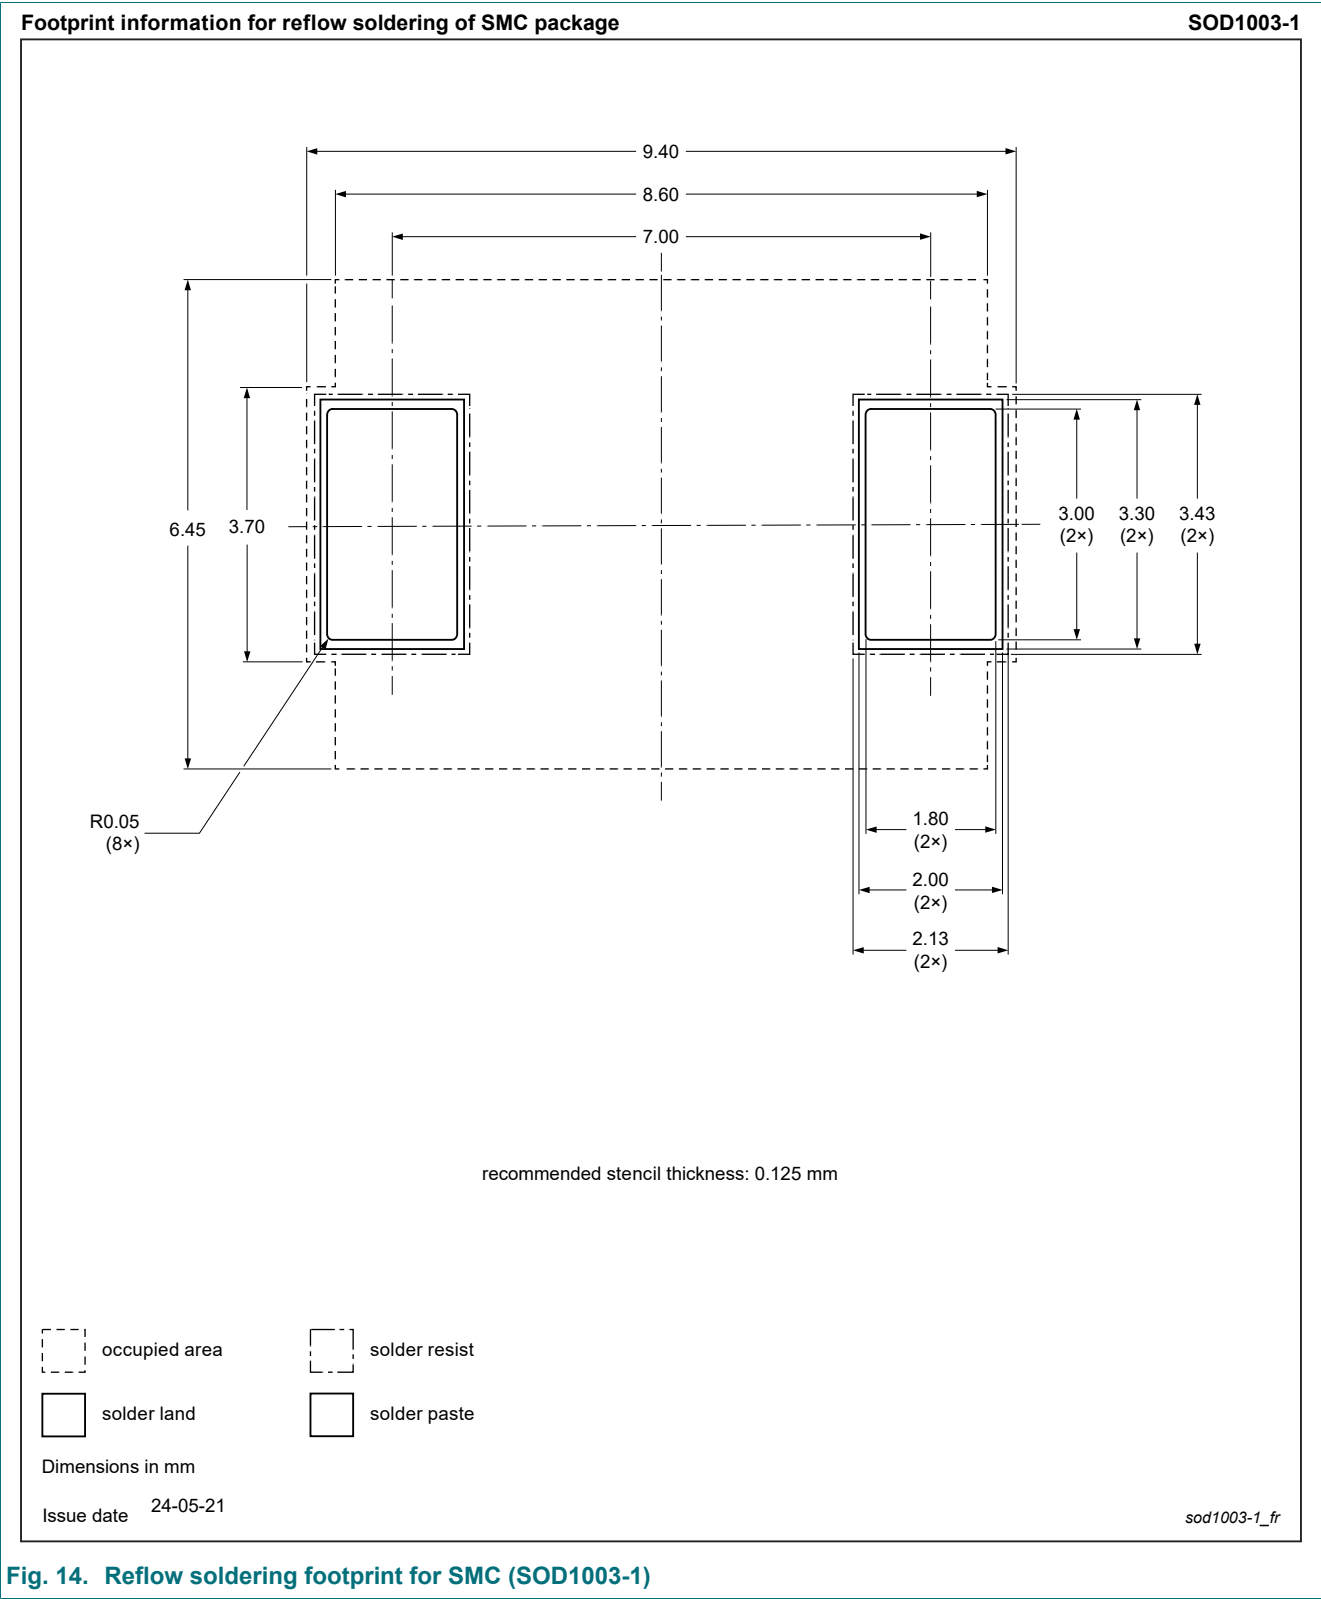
Reflow soldering footprint for SMC (SOD1003-1)
